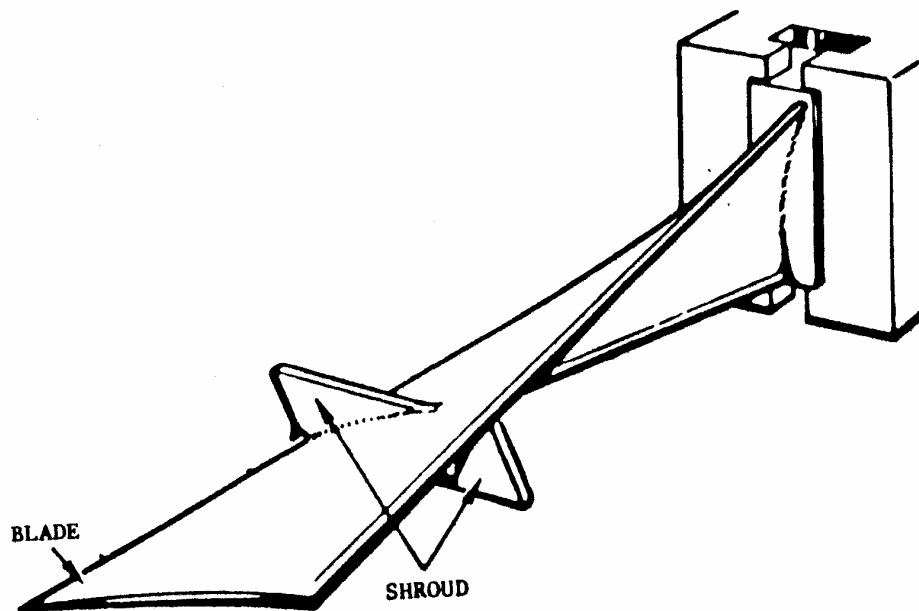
A shrouded fan blade in a gas turbine engine⁸
